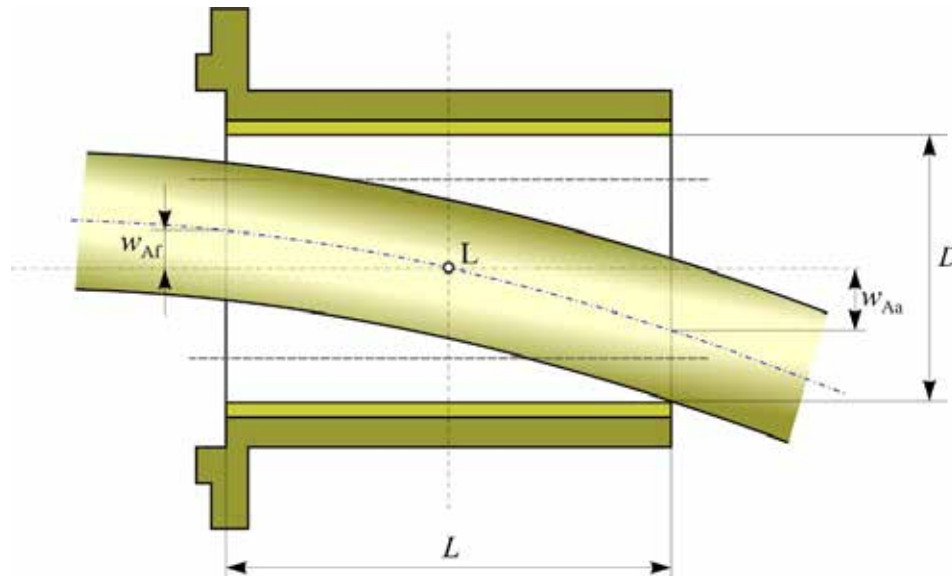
Deflection of the shaft sleeve in the stern tube bearing
